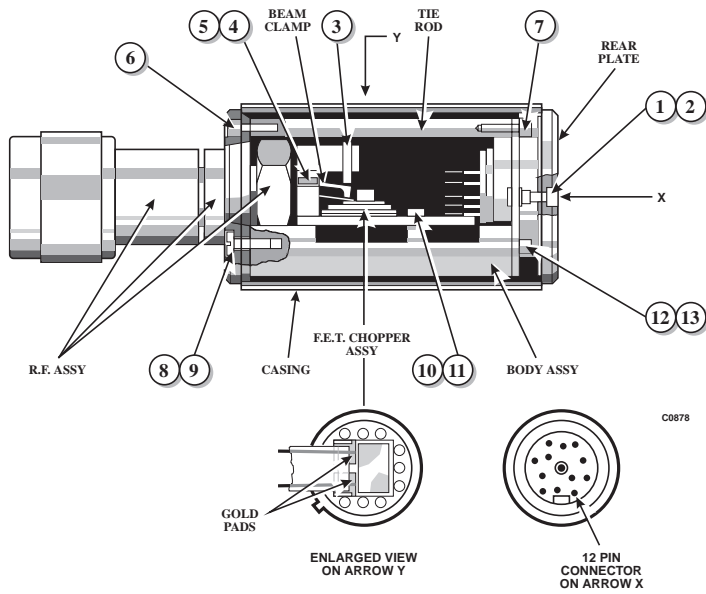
Access and layout diagram - 6910 and 6930 Series Sensors
